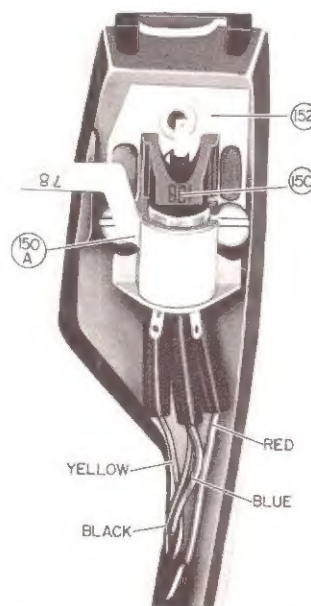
TONE ARM CARTRIDGE ASSEMBLY
